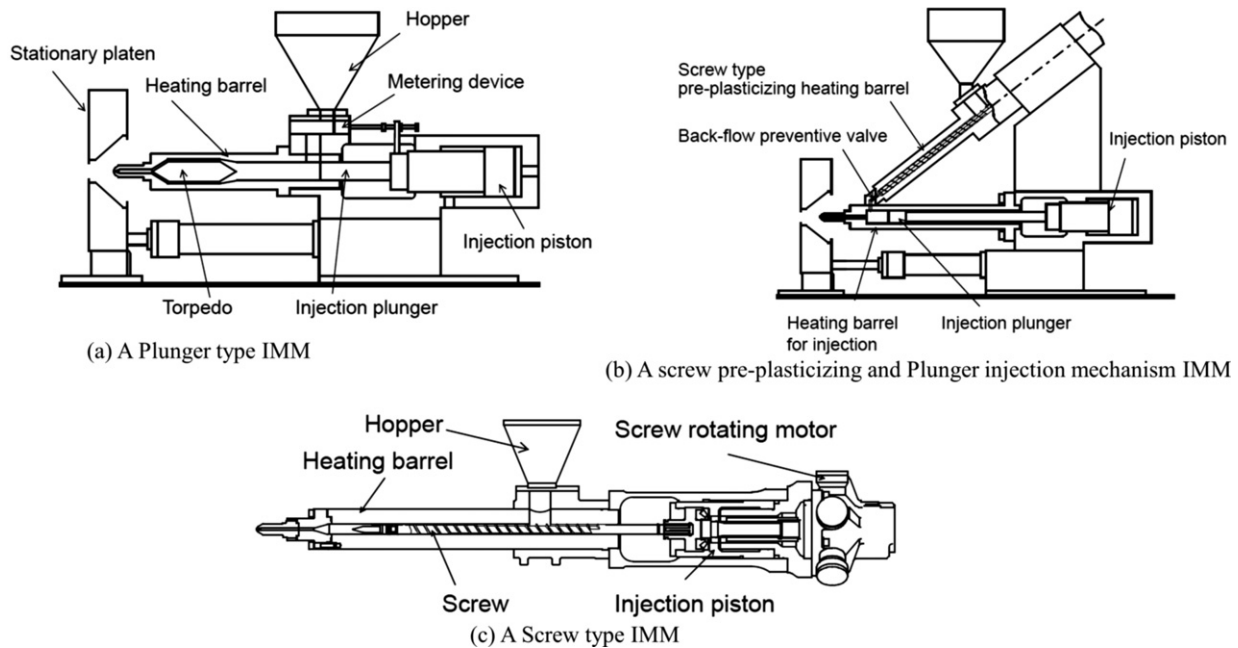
Schematic representation of the IMM based on injection unit. Sakai, T.; Kikugawa, K. Part II: Injection Molding Machinery and Systems: Injection Molding Machines, Tools, and Processes. In *Injection Molding*; Kamal, M. R., Isayev, A. L., Shih-Jung Liu, Eds.; Hanser, 2009; pp. 71–131.
